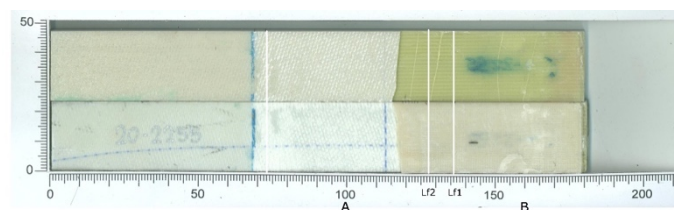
Example of a fracture surface after testing with a D-AM PEI/PC DCB specimen (specimen number 20-2255).
